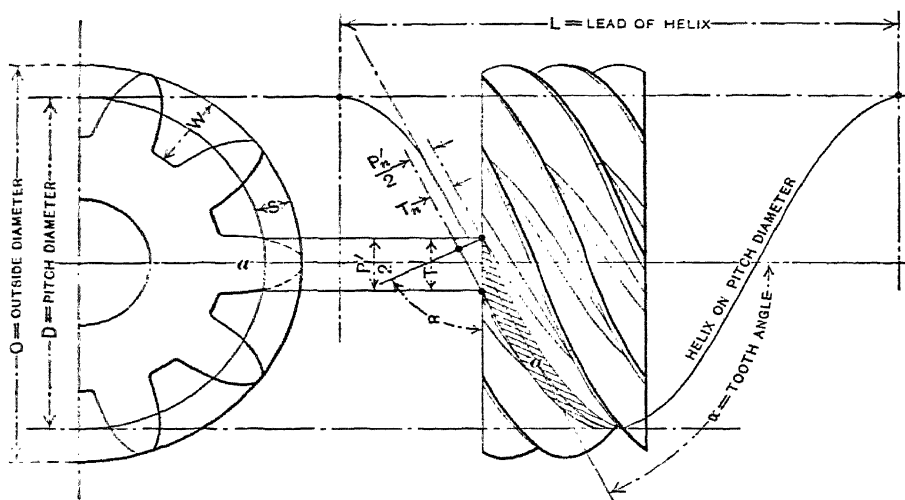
Diagram of Helical Gear Illustrating Terms used in the Calculations
